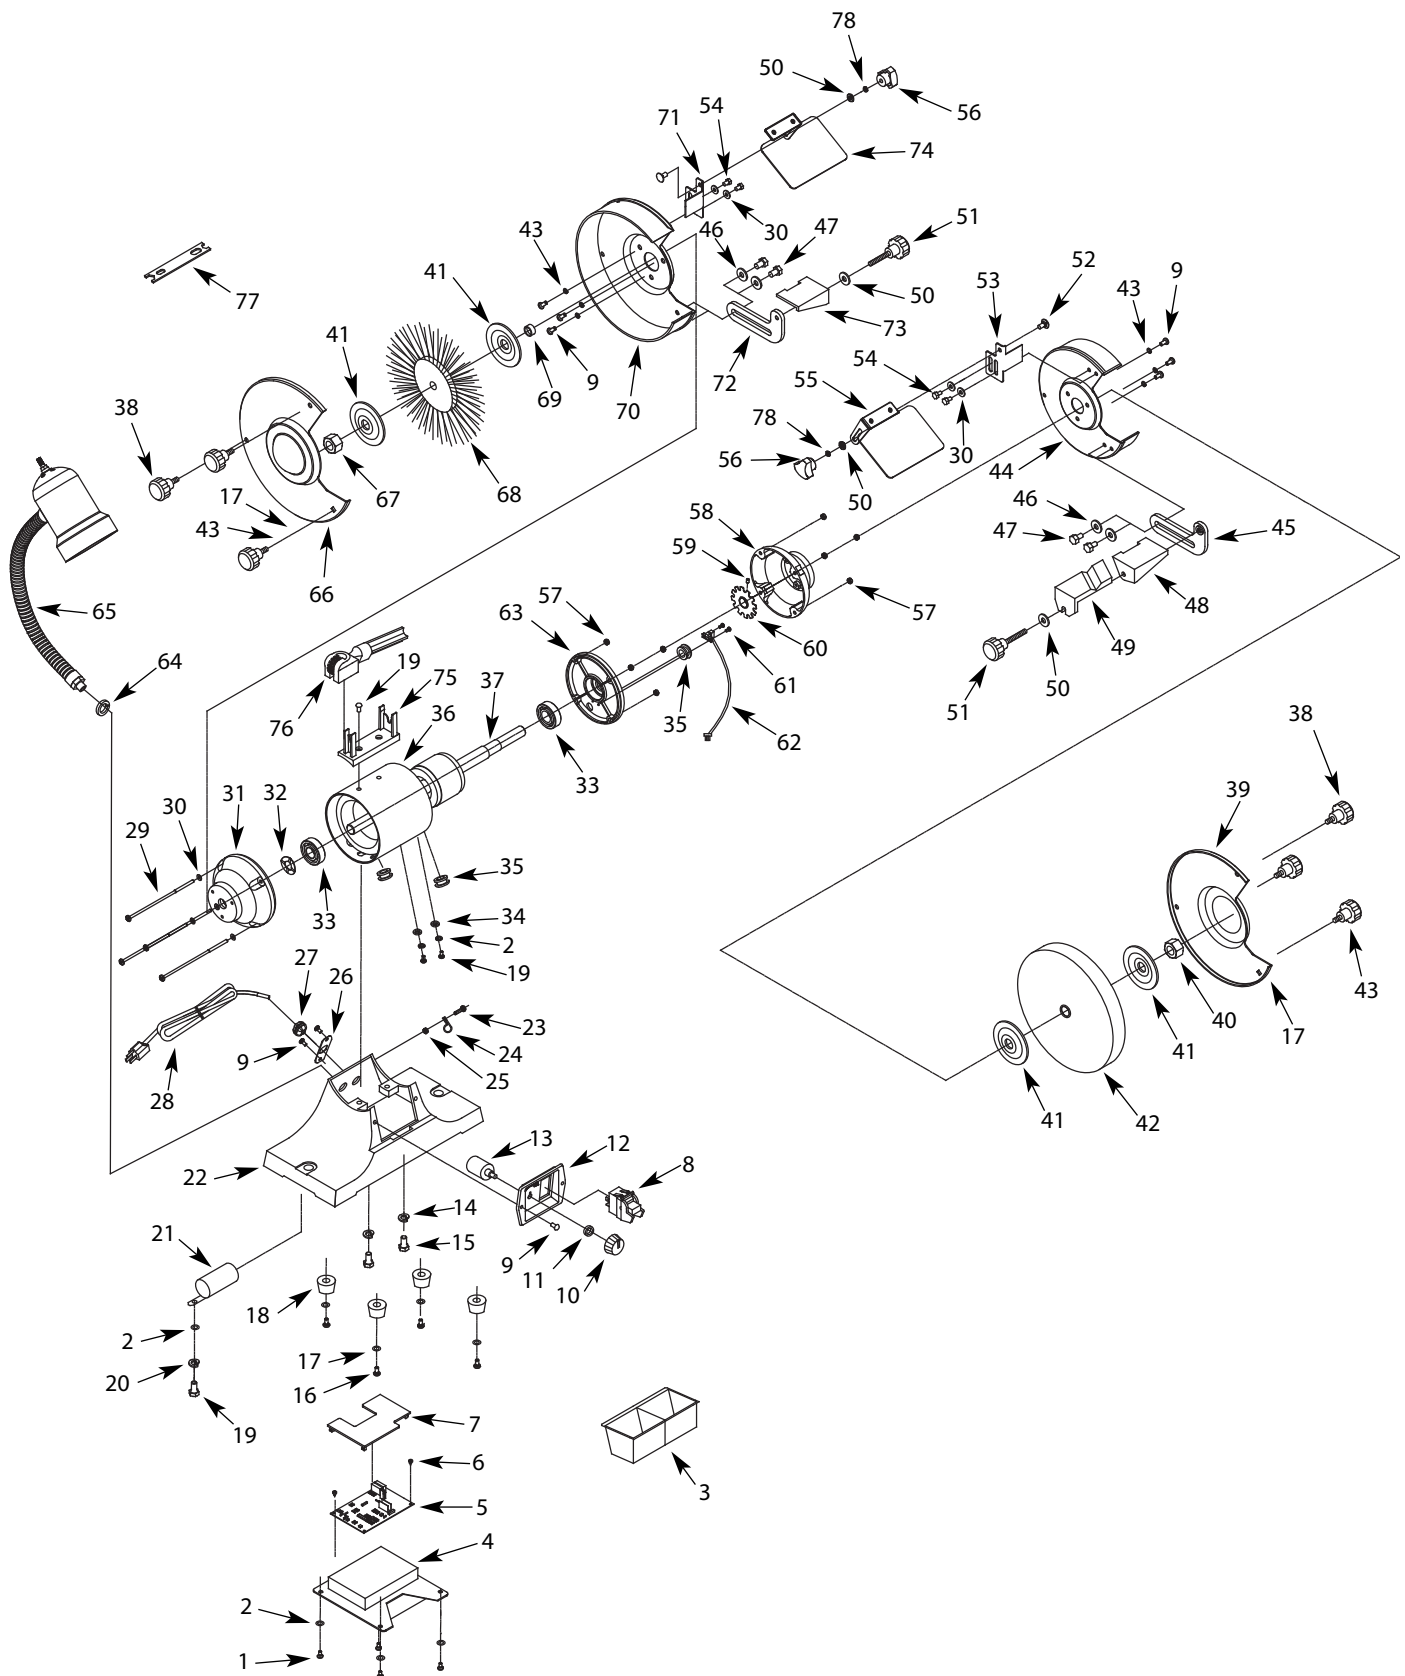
Replacement Parts Illustration for 9682089 8" Variable Speed Bench Grinder
